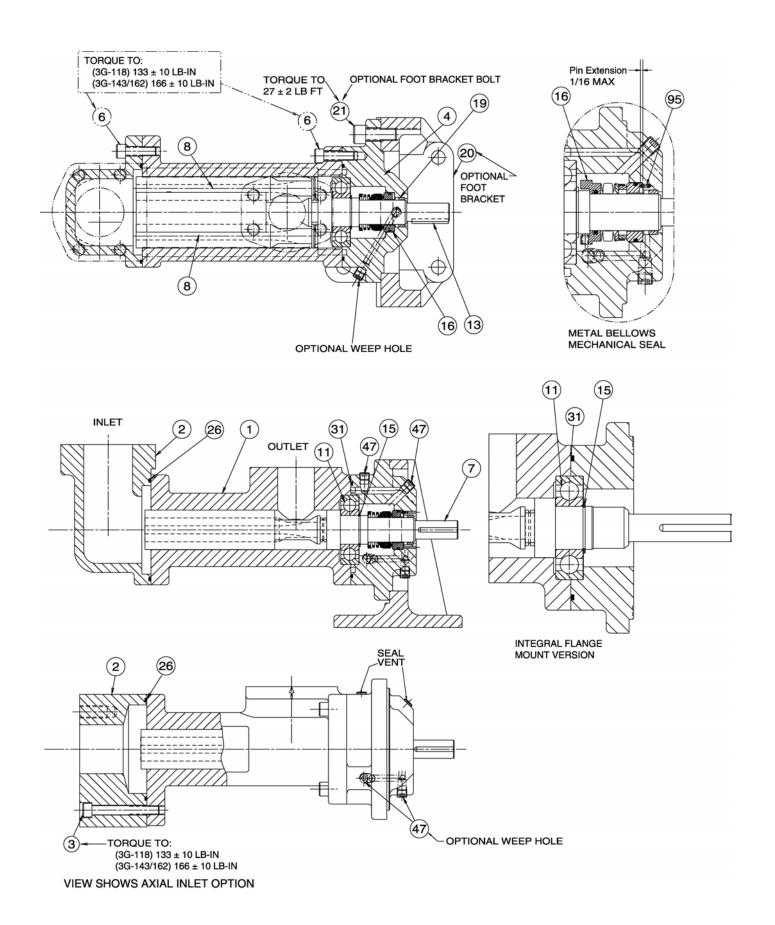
AA3G-118 to 162 Steel Pump Assembly
